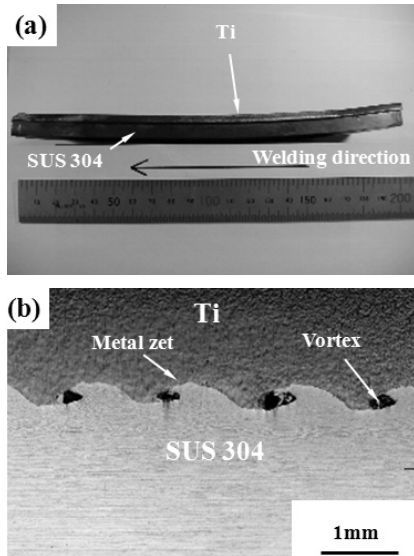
Photographs of (a) explosive-welded Ti-SUS 304 plates with 5 mm and 15 mm thickness, respectively and (b) interlayer taken by optical microscope
